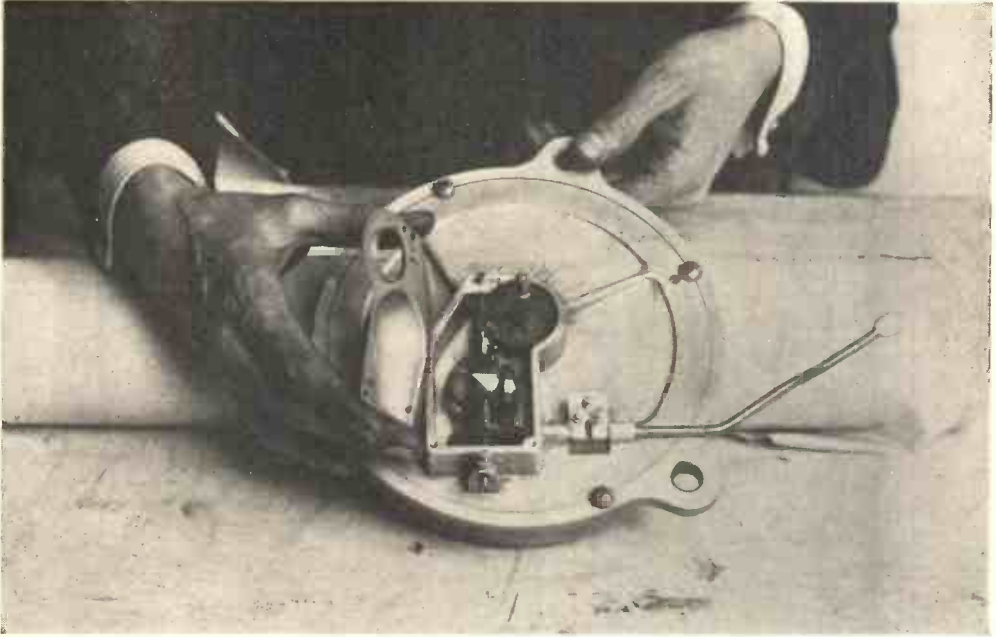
THE HIS MASTER'S VOICE 521 D.C. MOTOR WITH GOVERNOR REMOVED.
